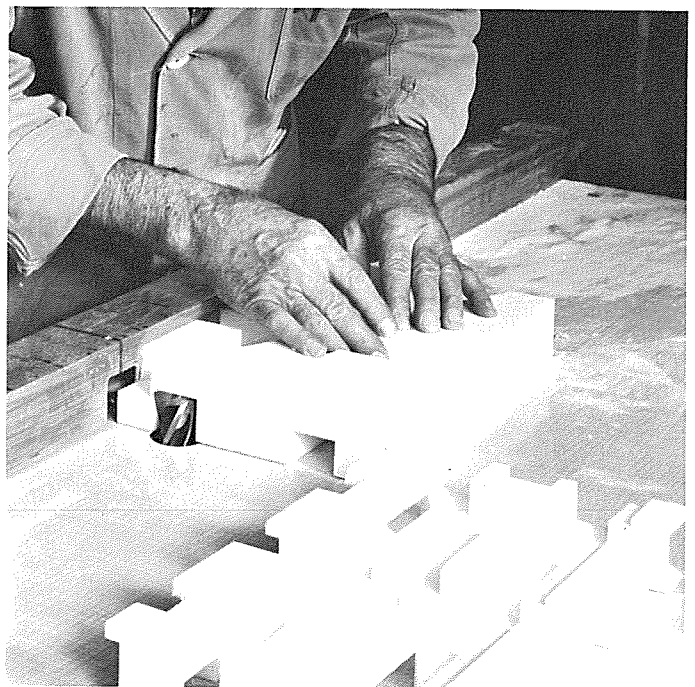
Grooves, rebates and other profiles can be cut with a routing cutter. If due care is taken, the material can be routed to web widths of 2 mm.
